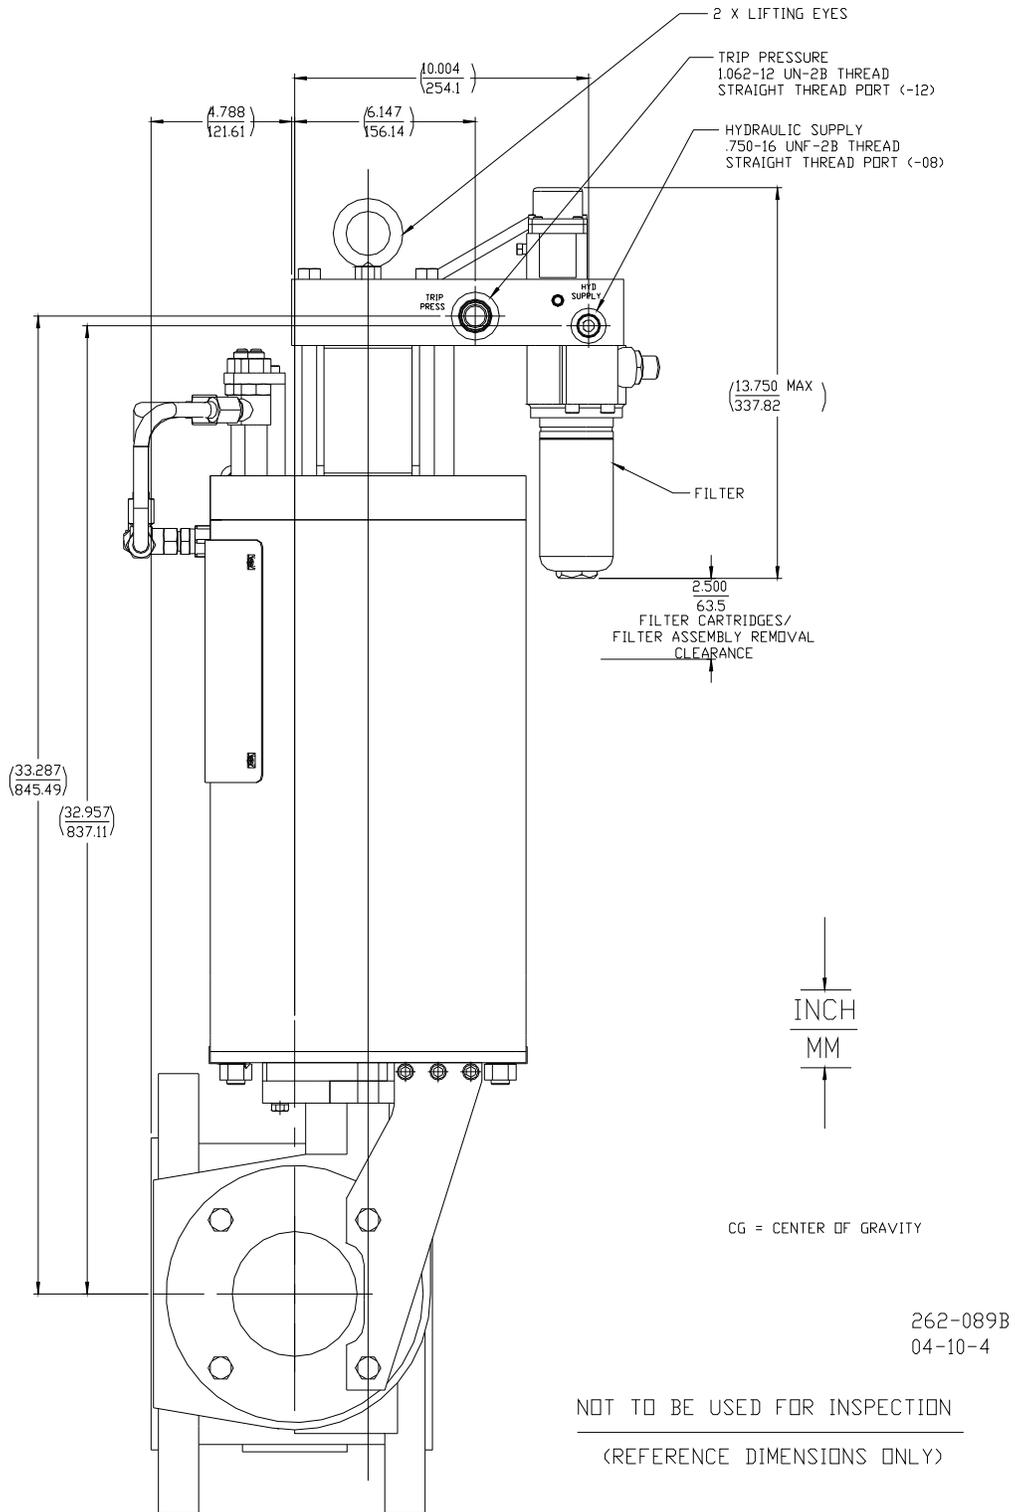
Gas Stop/Ratio Valve Outline Drawing (8-inch, with 3 LVDTs)
